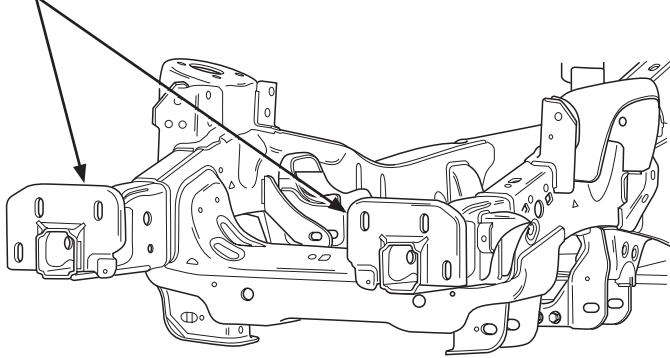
VIEW OF FRAME SHOWING FRONT BUMPER BRACKETS
